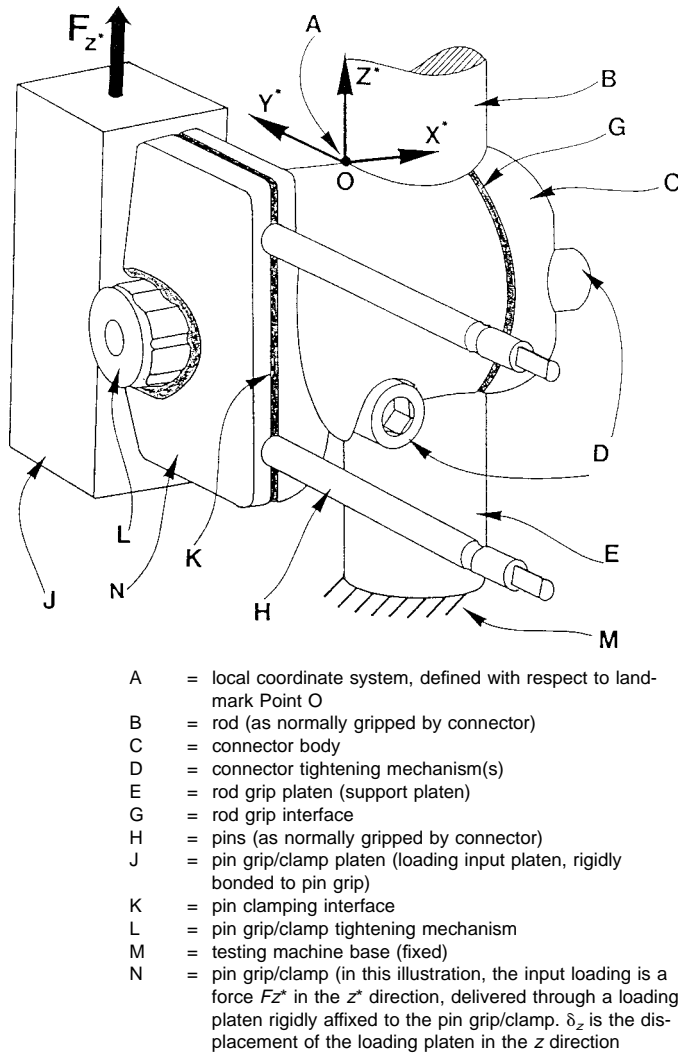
Schematic for Testing an External Fixator Connector (Example, Generic for a Pin-Rod Joint)
